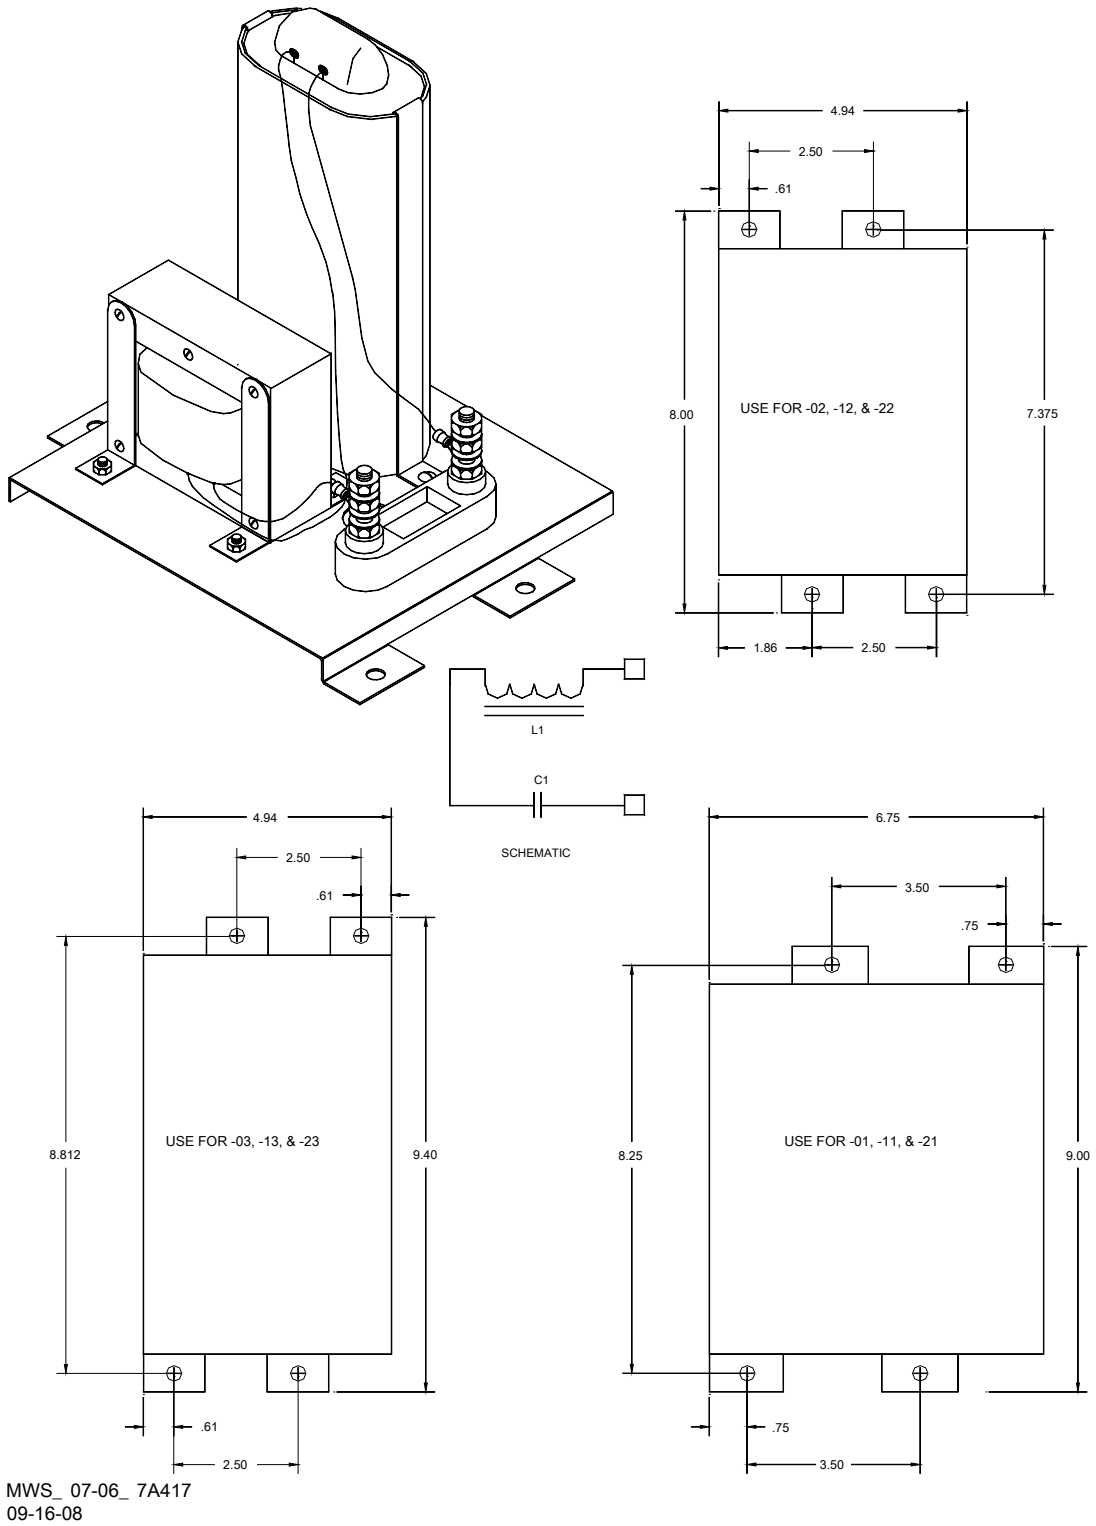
Cab Signal Filter, 7A417-X, with Mounting Dimensions
